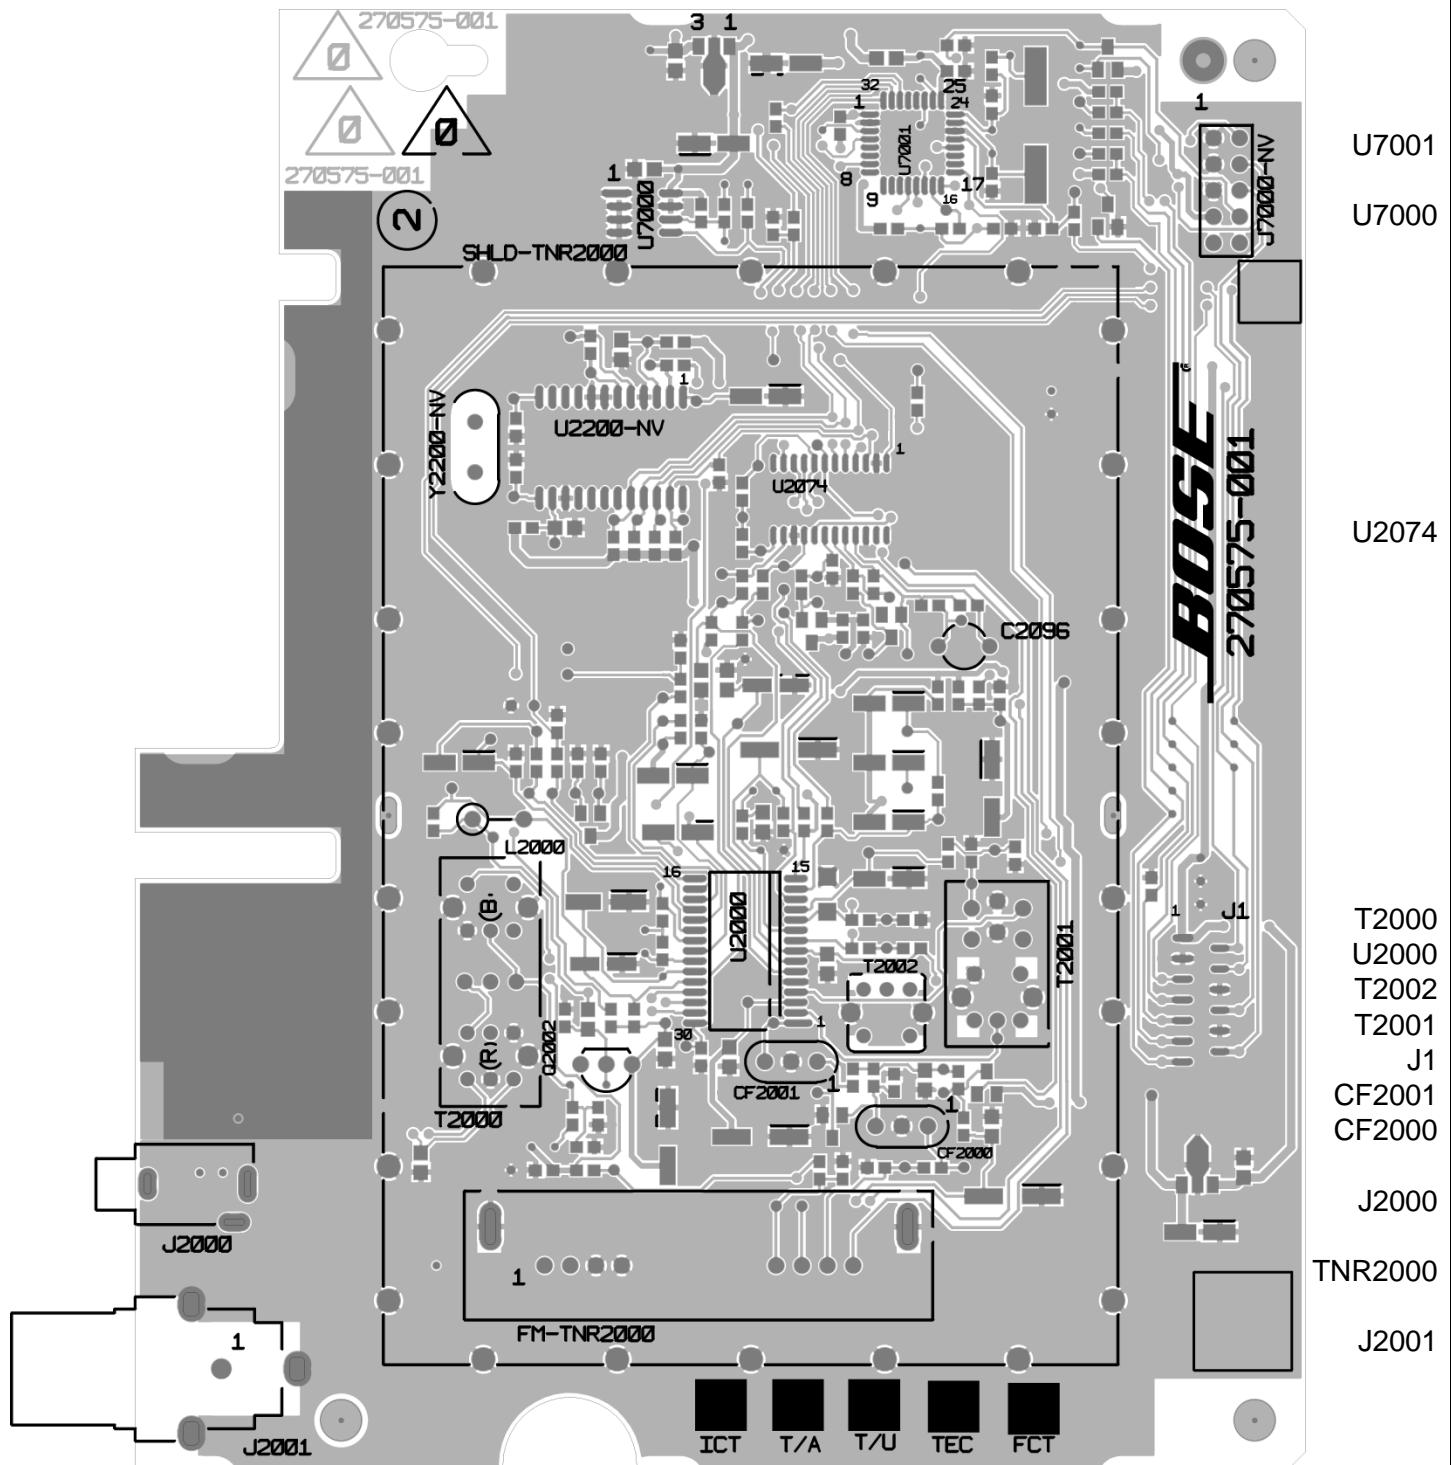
Console Tuner PCB Topside Etch Layout Diagram
